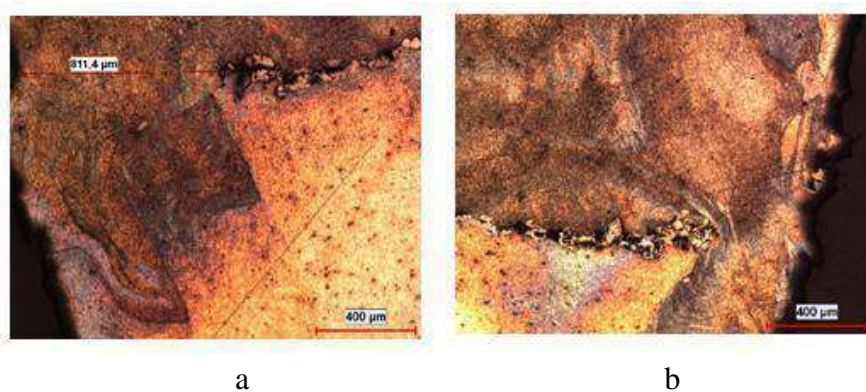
In the friction stir welding application, the welding cross section is the effect of the joining of the nickel coating on the a- Welding left side wall zone and b- Welding left side wall zone of the 3.8mm plunge depth and 9s dwell time
